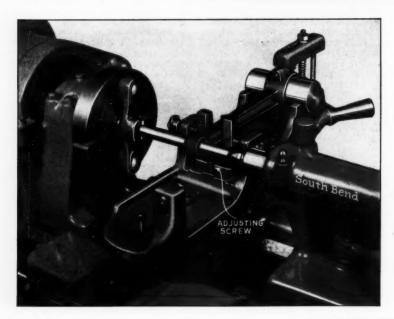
(Bottom) Line boring piston pin bushings in connecting rod.
